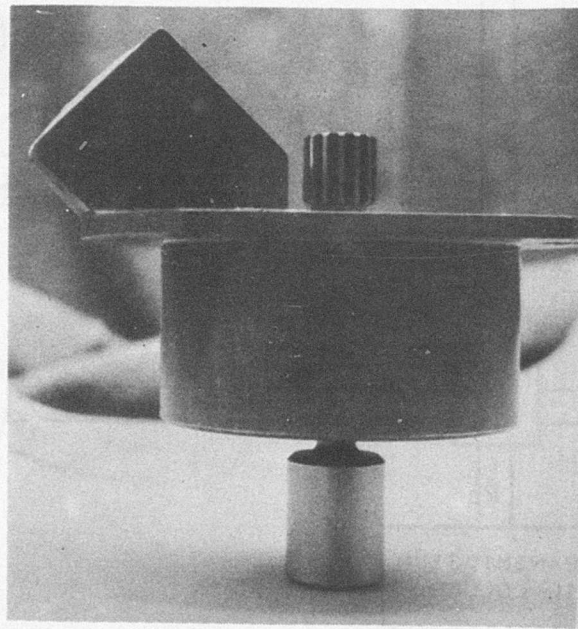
Emergency lubrication pump for HST showing undercut shaft.
